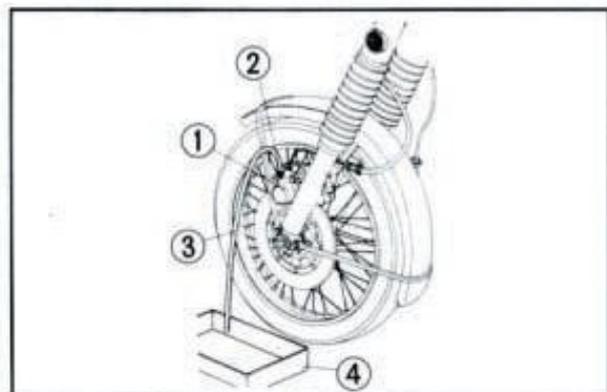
① Caliper ② Bleeder ③ Bleeder hose ④ Vessel
